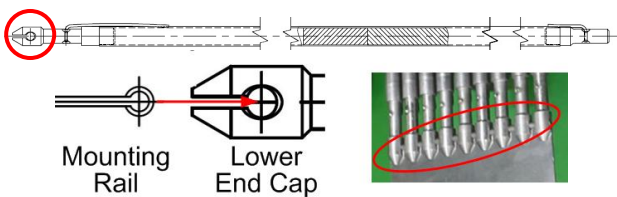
Schematic view of SFR fuel rod and connection between lower end cap and mounting rail. Actual assembled state is also given
